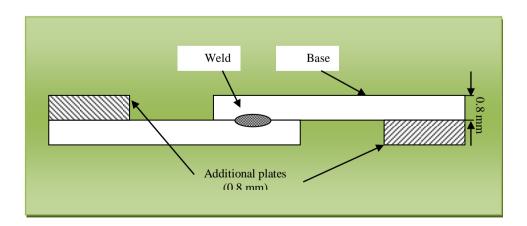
Standard Tension Test Specimen for Seam Welded Joints.
